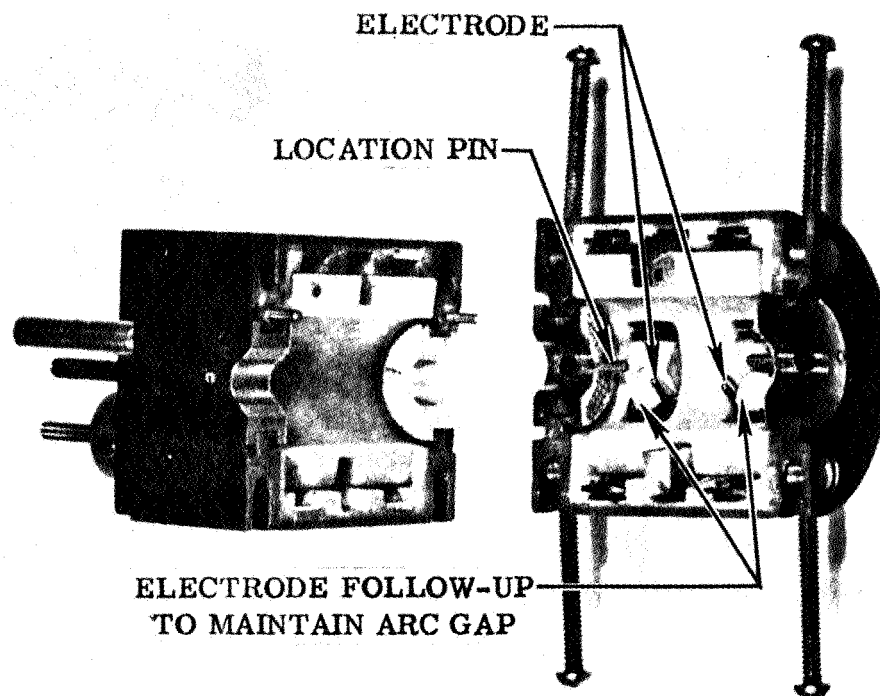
PHOTOGRAPH OF EXTERNAL WELDING TOOL FOR GTA WELDING STAINLESS STEEL TUBING (REF.34)
